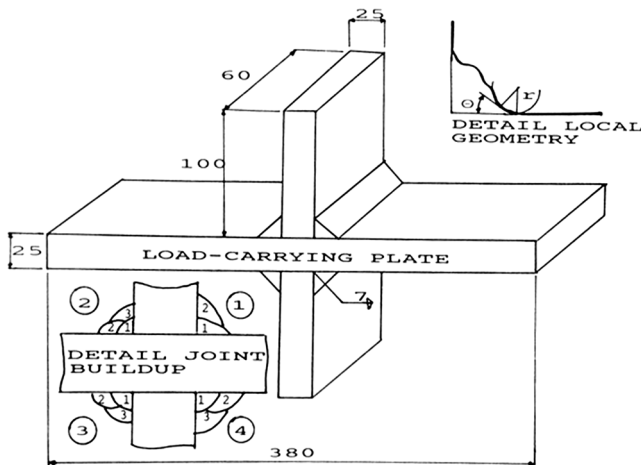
Test specimen and local weld toe geometry (top right corner) [19].
